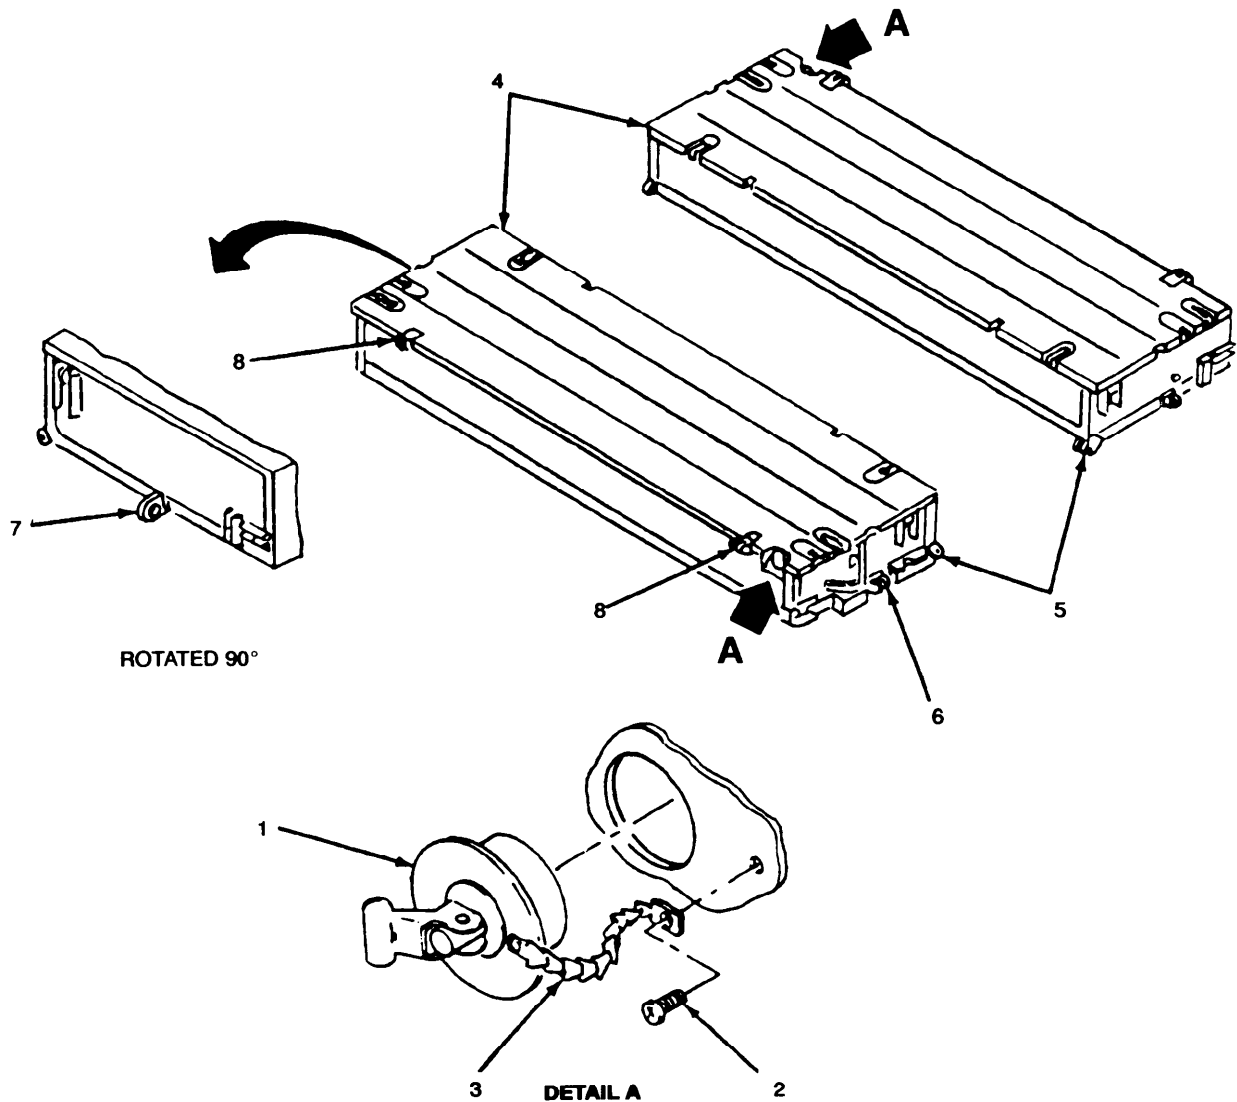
Interior Bay Roadway Ponton, Repair.
